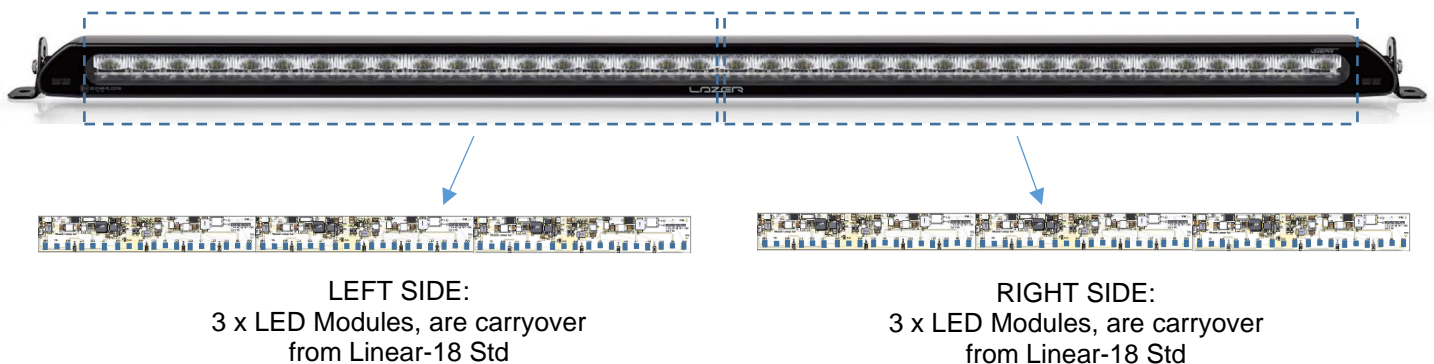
Board Design and component layout (2 LED modules shown, additional 5 LED modules will be in the lamp)
